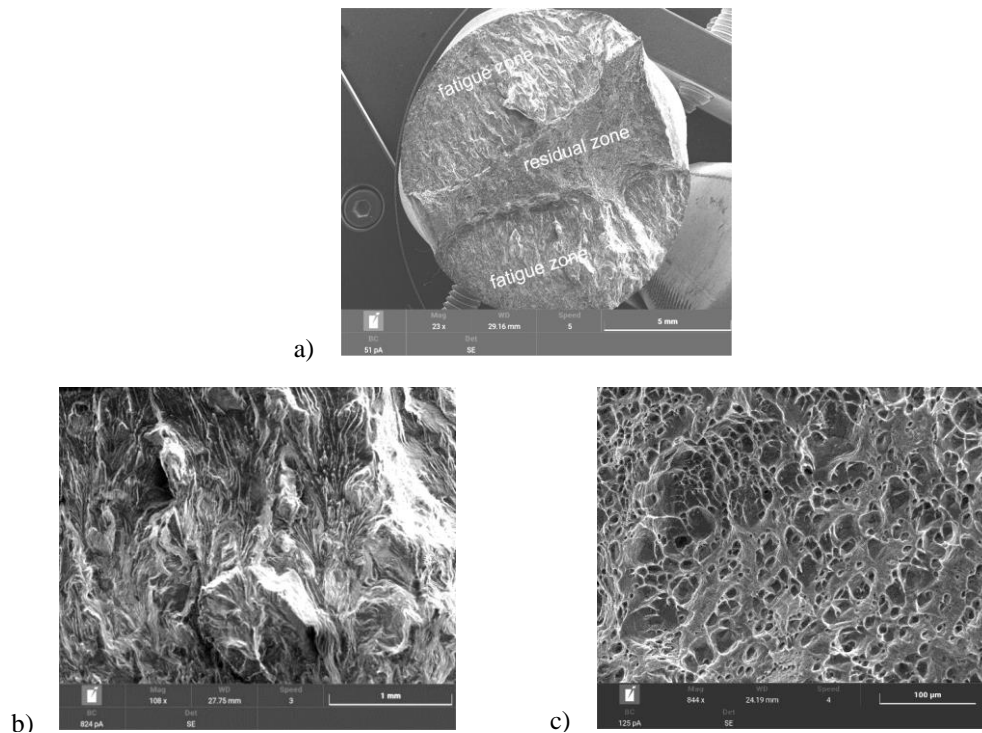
Fatigue fracture of the alloy after T64 treatment caused by bending: a) fracture morphology, b) surface in the area of the fatigue zone, c) surface in the area of the residual zone (specimen 23 – 2 699792 cycles).
